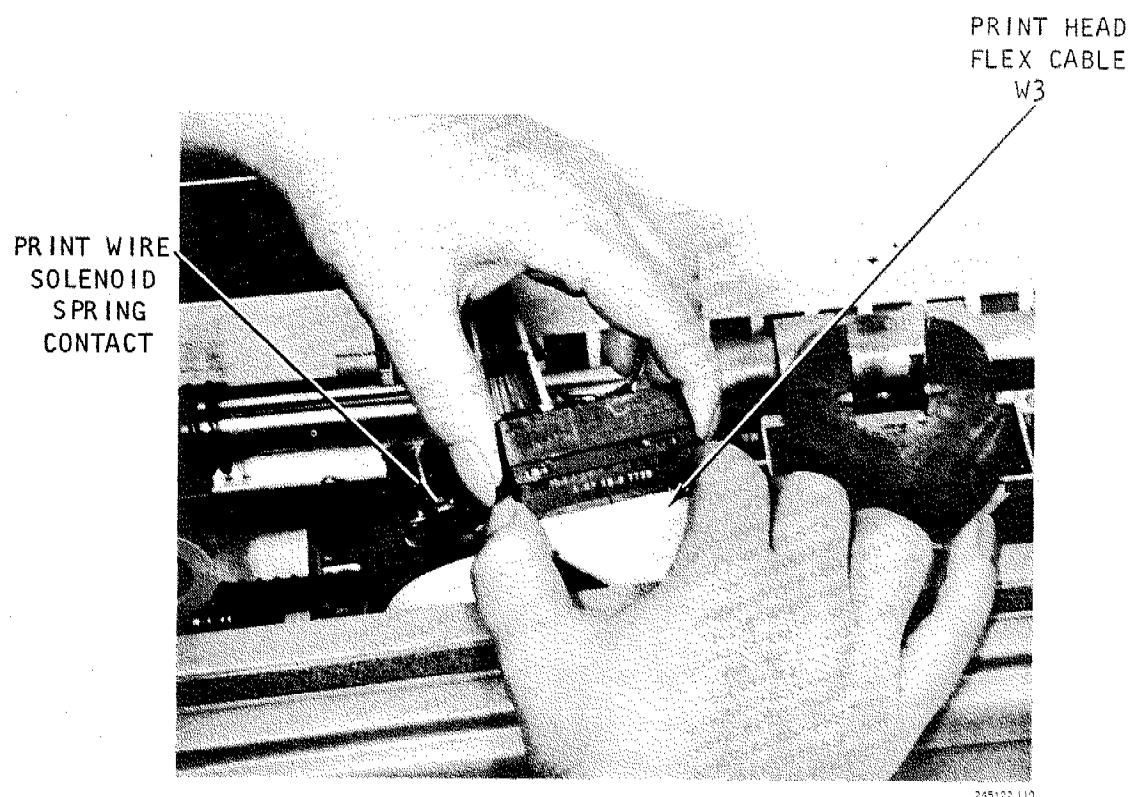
M-Series Print Head Flex Cable Removal/Replacement
